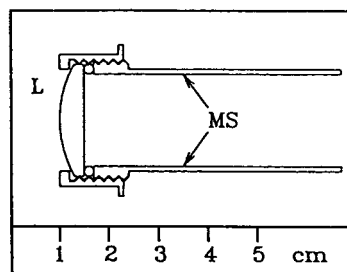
Mechanical details of light-propagating tube and modified window holder. L = Lens; MS = mirror surface.
